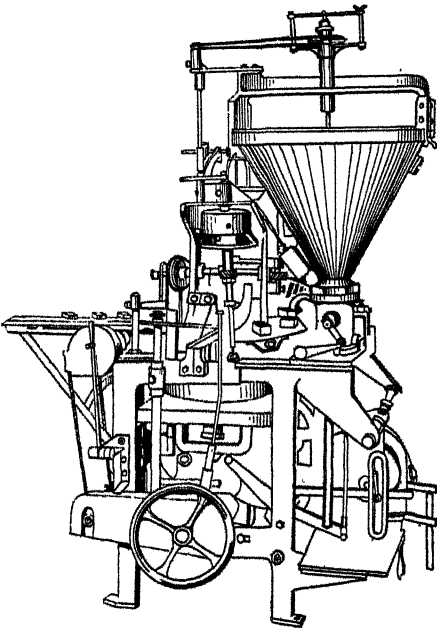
Automatic machine for filling the moulds, packing and labelling the processed cheese.
